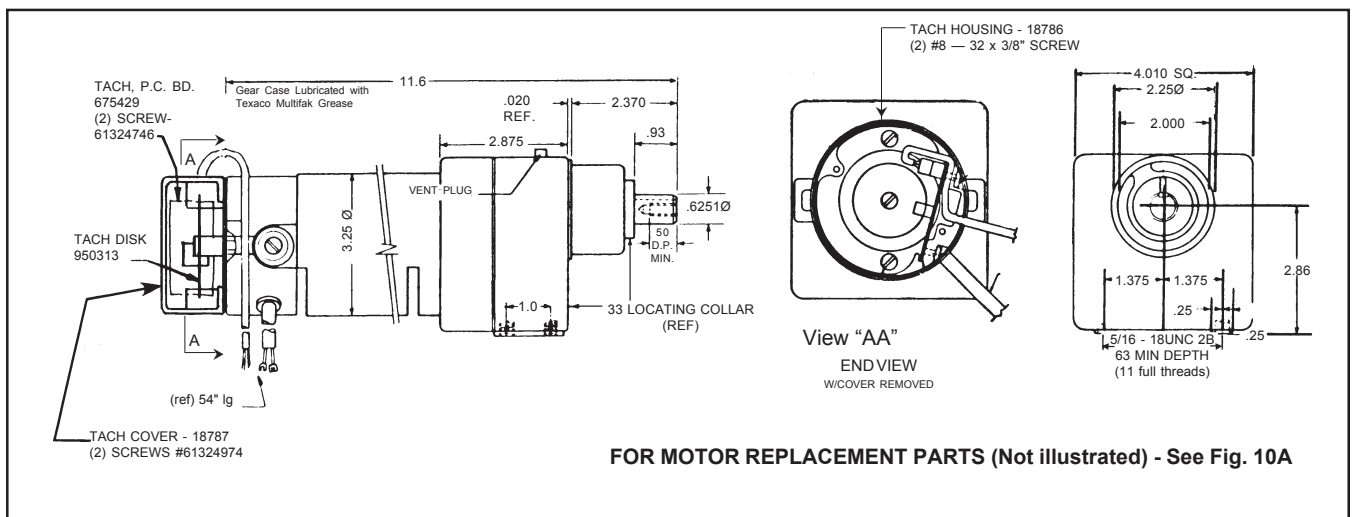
Digital Motor-Gear Unit Assembly (40:1), P/N 679777
